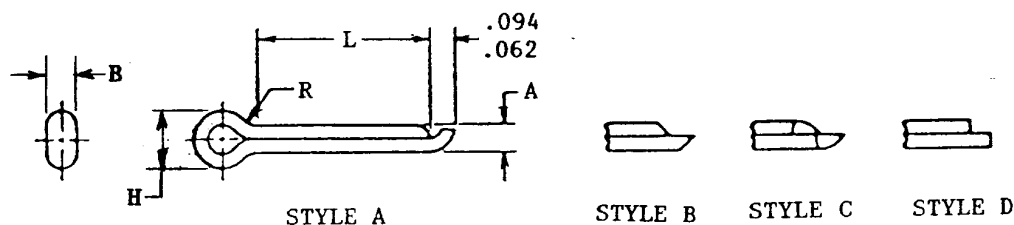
Cotter Pin Dimensions and Optional Ends
